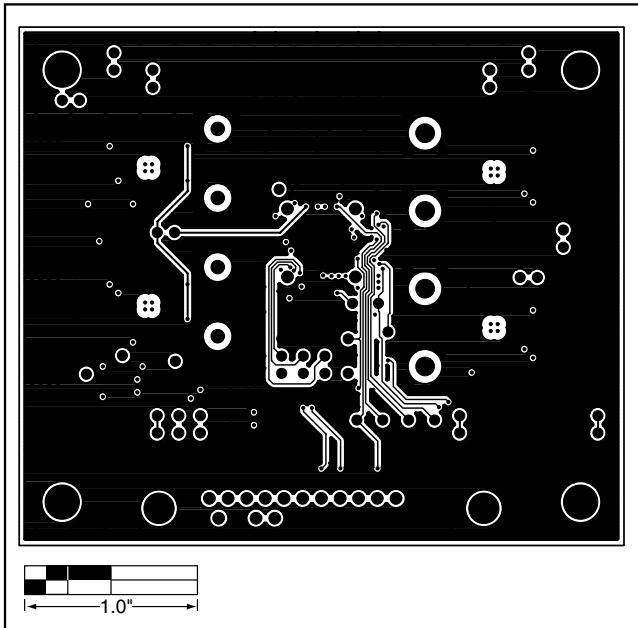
MAX2820/MAX2821 EV Kits PC Board Layout—Inner Layer 3
